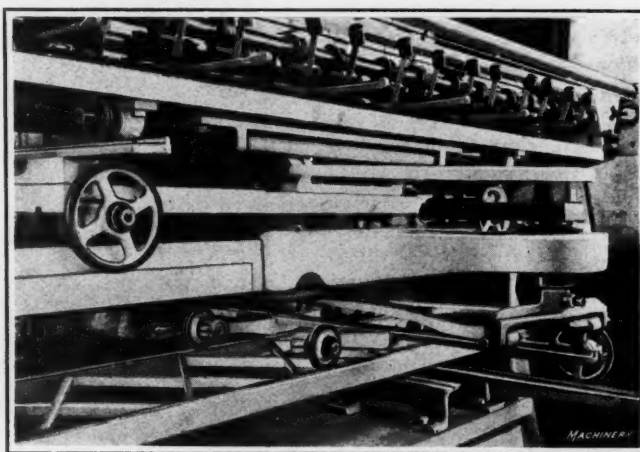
Close View of Carriage that supports Control Mechanism on Hope Graduating Machine
